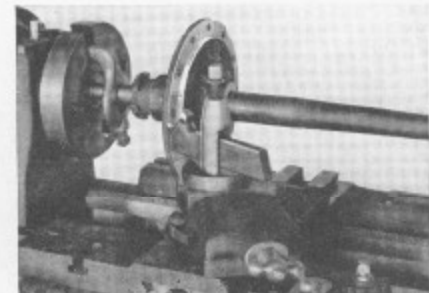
Truing a Damaged Rear Wheel Hub Flange using Axle to Mount between Centers.
